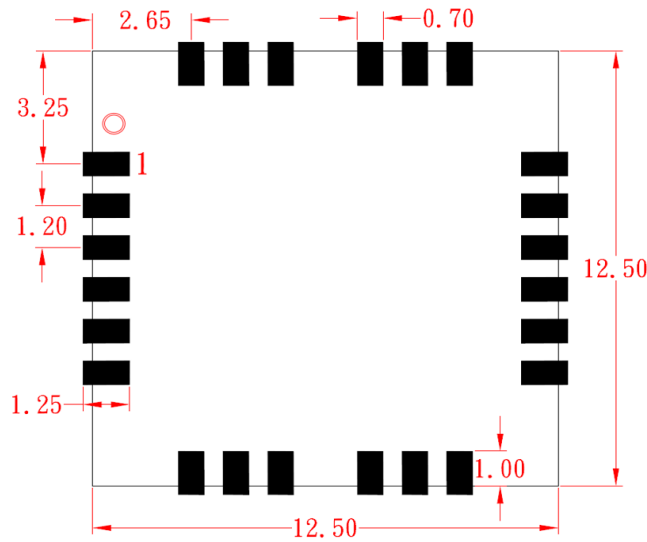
Recommended PCB Layout for XA1110 and XA1210 Migration
